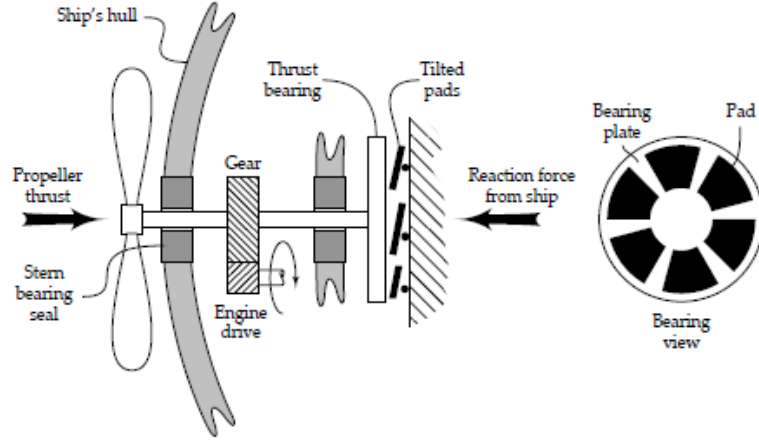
Example of a pad bearing application to sustain the thrust loads from the ship propeller shaft.
